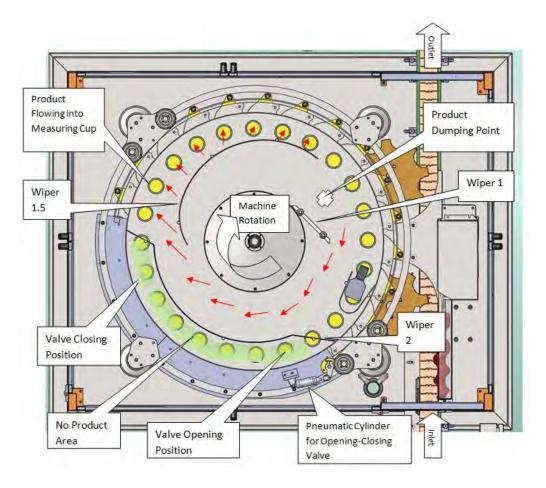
Flow of Filling Material in Tuna Flake Filling Prototype Machine
